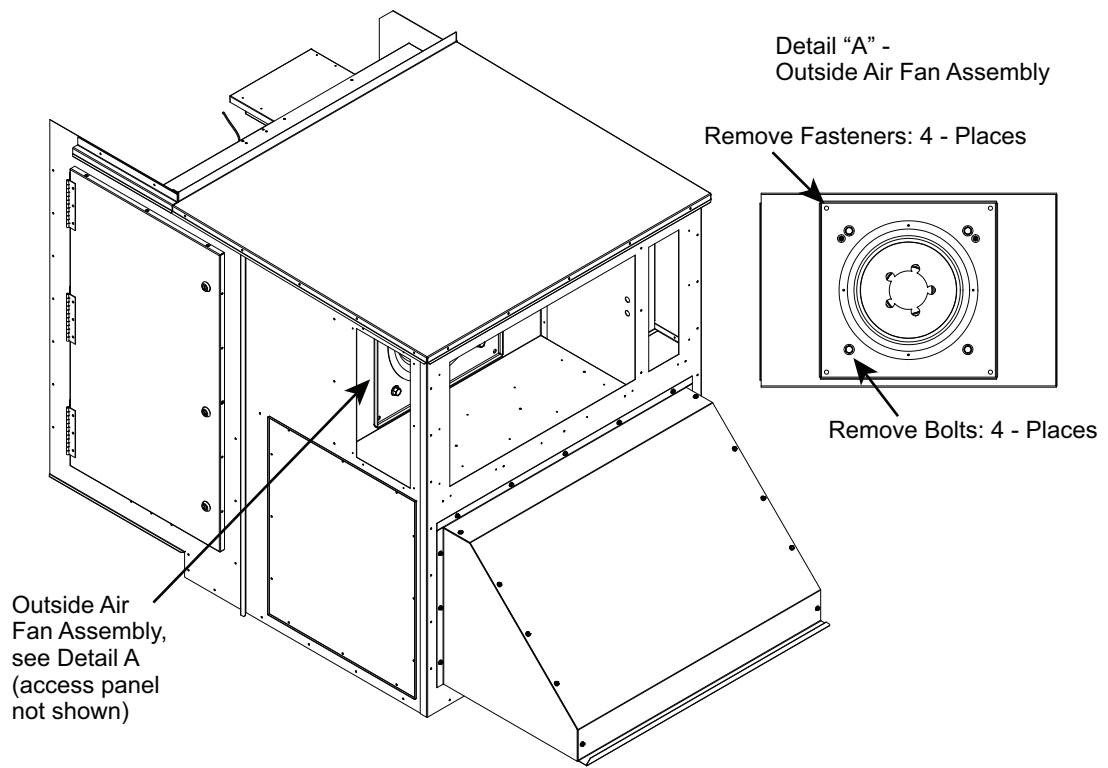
Remove Fasteners from Corners of Outside Air Fan Assemble
